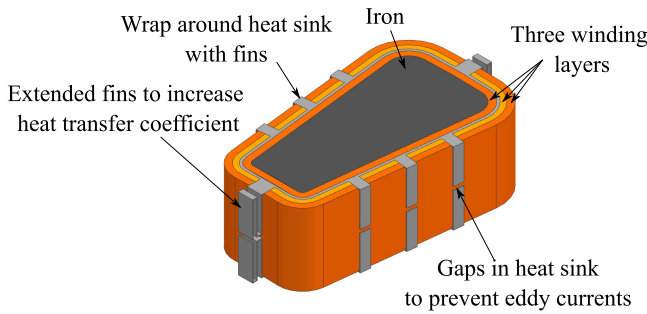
YASA AFPM motor immersion heat sink design [120].
